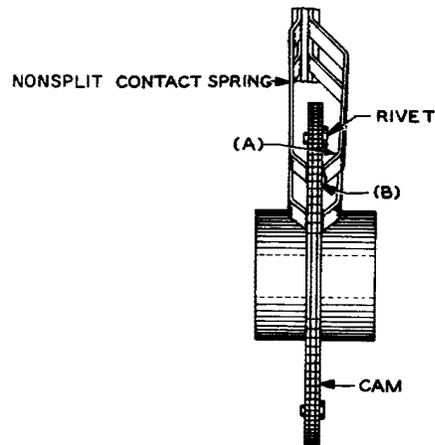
Contact Spring Pressure and Parallelism Requirements With One Spring Out of Parallel
